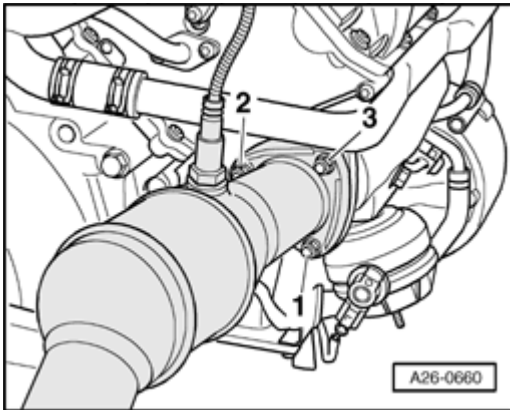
Removing Front Exhaust Pipe From Right Exhaust Manifold Nuts
